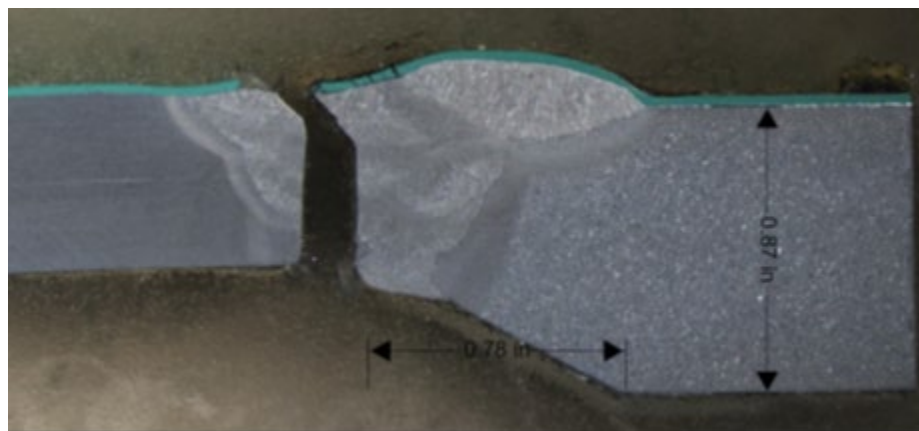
As-Fabricated Bevel Length for the TAG 98 Butt Weld Joint at Crack 2
